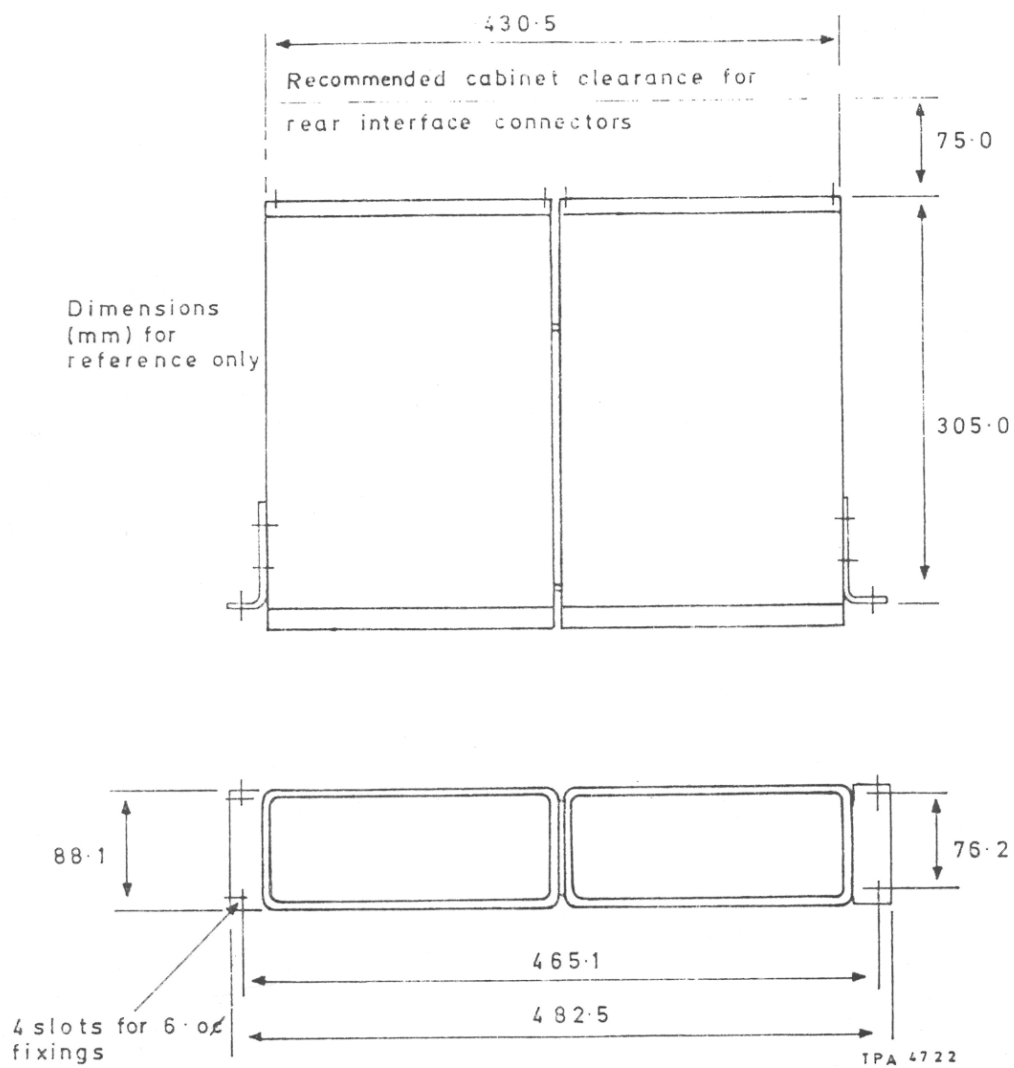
Dimensions (in mm) of twinned rack mounting units
